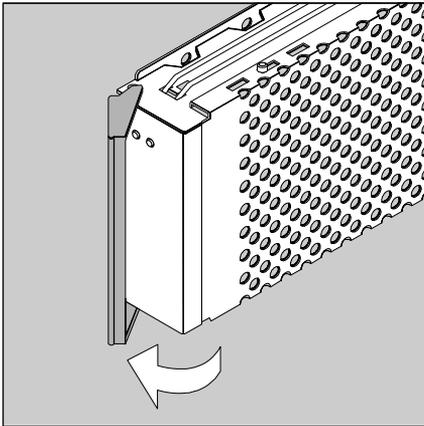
3½ inch mounting frame with a 3½ inch hard disk
